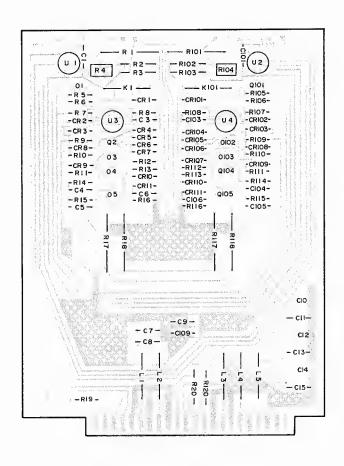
A16 Vs/Vm Board Assembly Component Locations.
